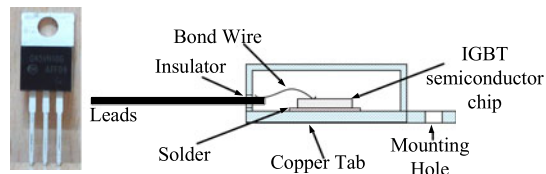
Cross-sectional view of TO-220 Package of IGBT.
